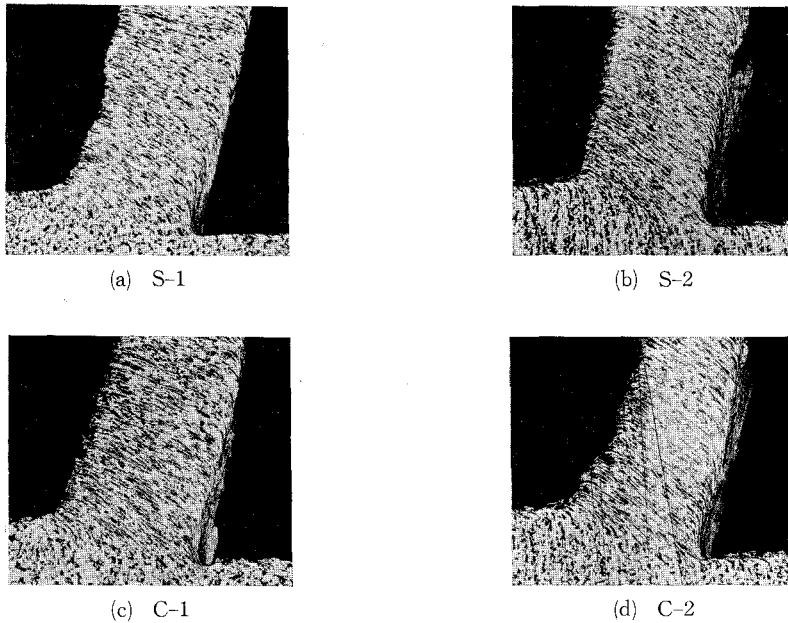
Photomicrographs of tool-work-piece sections from cuts using H.S.S. tools. Cutting condition: depth of cut, 1.5 mm; feed, 0.3 mmpr; cutting speed, 50 mpm; cutting fluid, dry.
